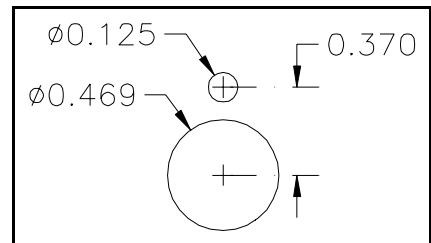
Hole Layout for S700 Series Toggle Switches.
